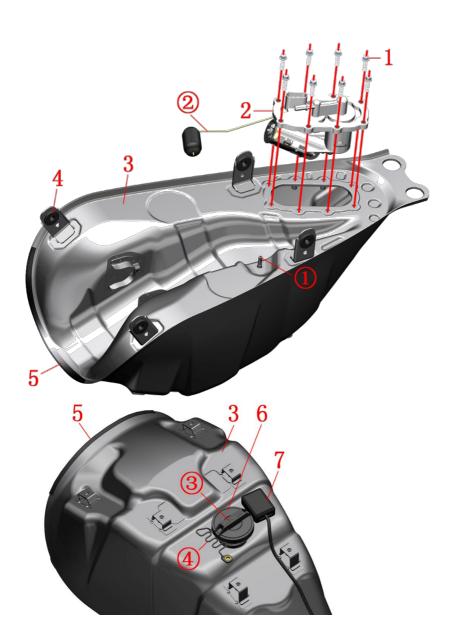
FI	UEL TANK INNER	Fuel tank inner tank	CHK	(0)
